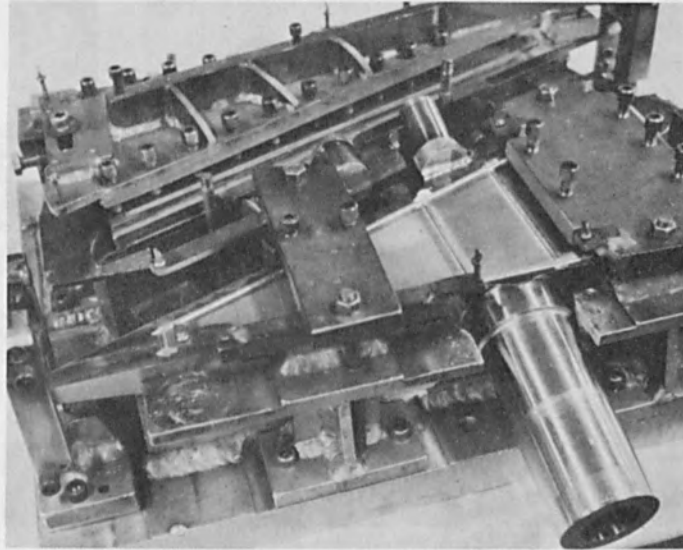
Weld holding fixture with hold down tooling in place to show part of tooling for spike weld.
